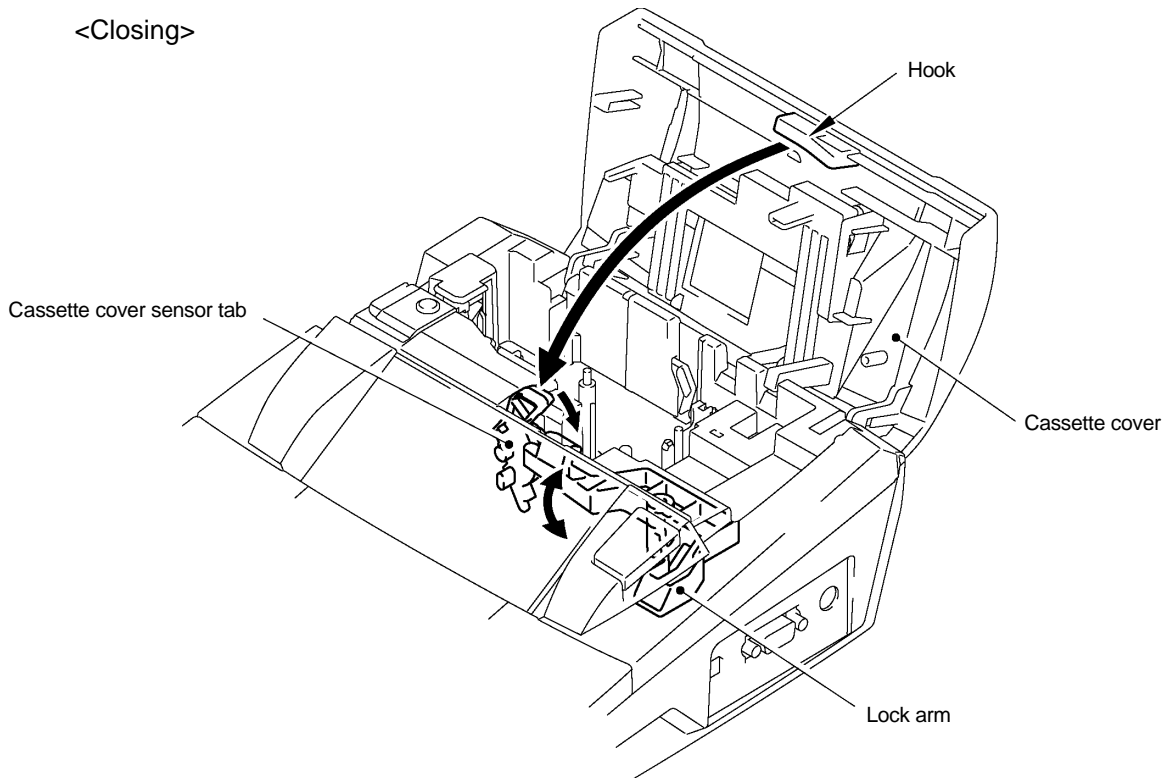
Roller Holder ASSY & Cassette Cover Interlocking Mechanism
